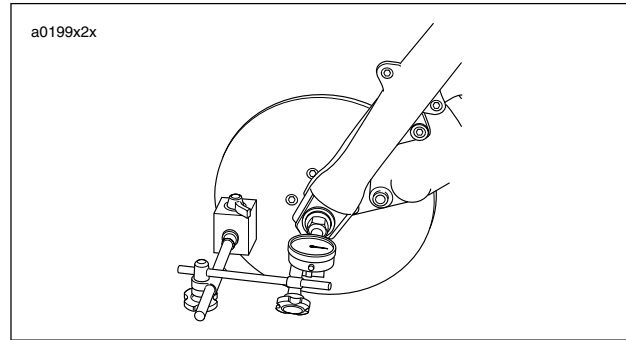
Wheel Bearing Inspection (Front Wheel Shown)
